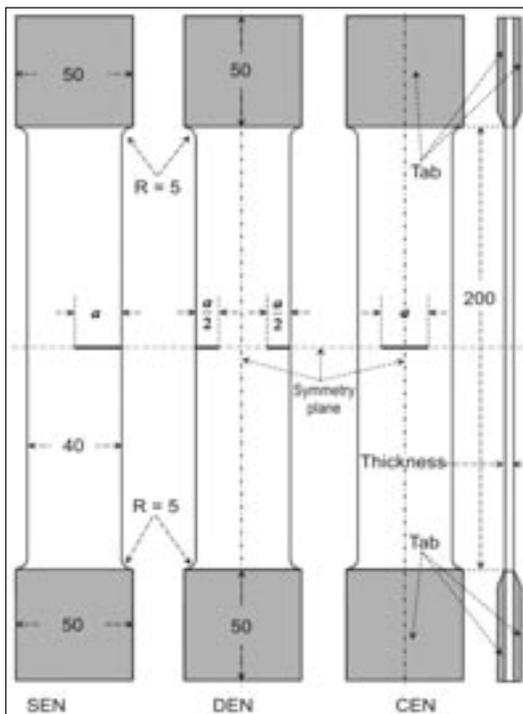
Dimensions for SEN, DEN and CEN specimens: notch depth, $a = 5 \sim 20$ mm; all dimensions, in mm
